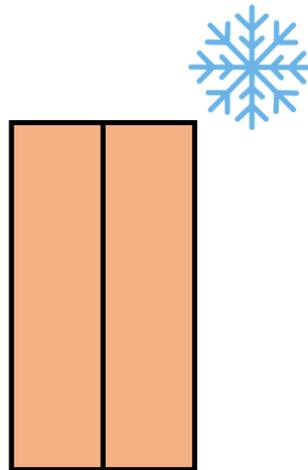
Concept 5: *Precooled Mold* uses external cooling of the whole mold before injection.
